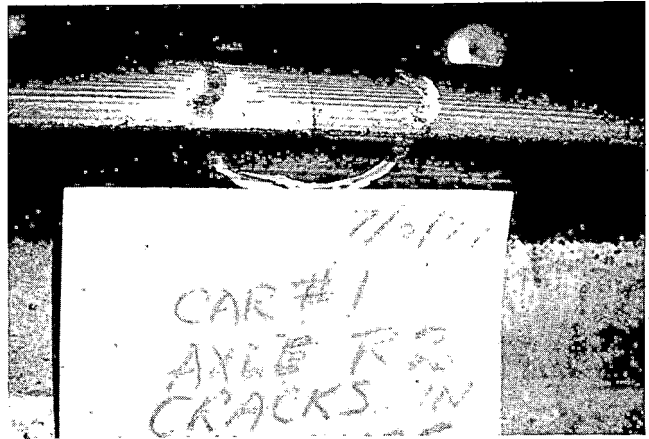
SECTION OF CRACKED WHEEL FLANGE
